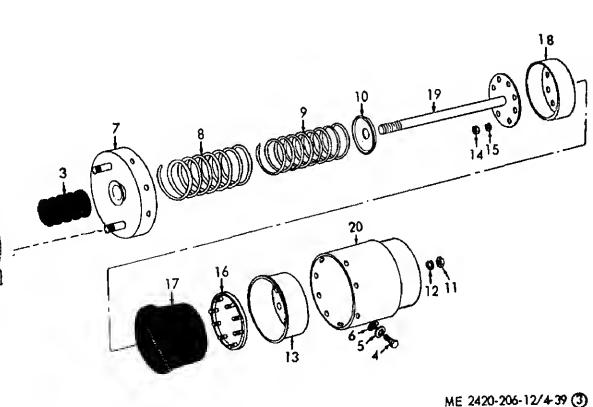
Brake actuator and hydraulic tank, removal, disassembly, reassembly and installation (sheet 2 of 3).
